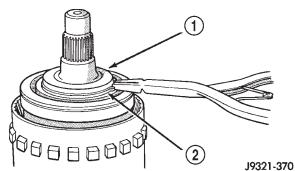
Rear Bearing And Snap Ring Installation 1 – REAR BEARING
